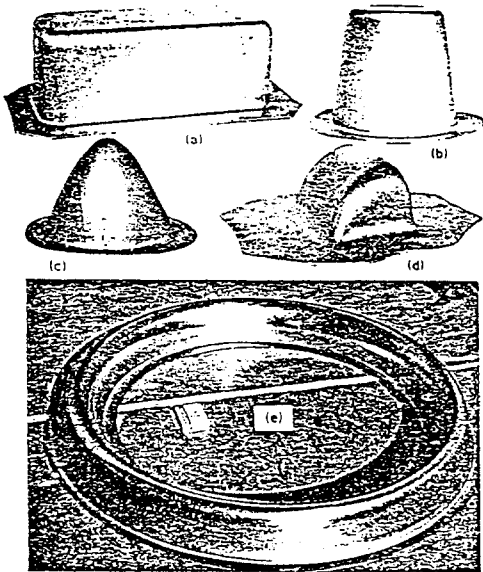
Aircraft parts obtained by hydraulic counter-pressure forming.
